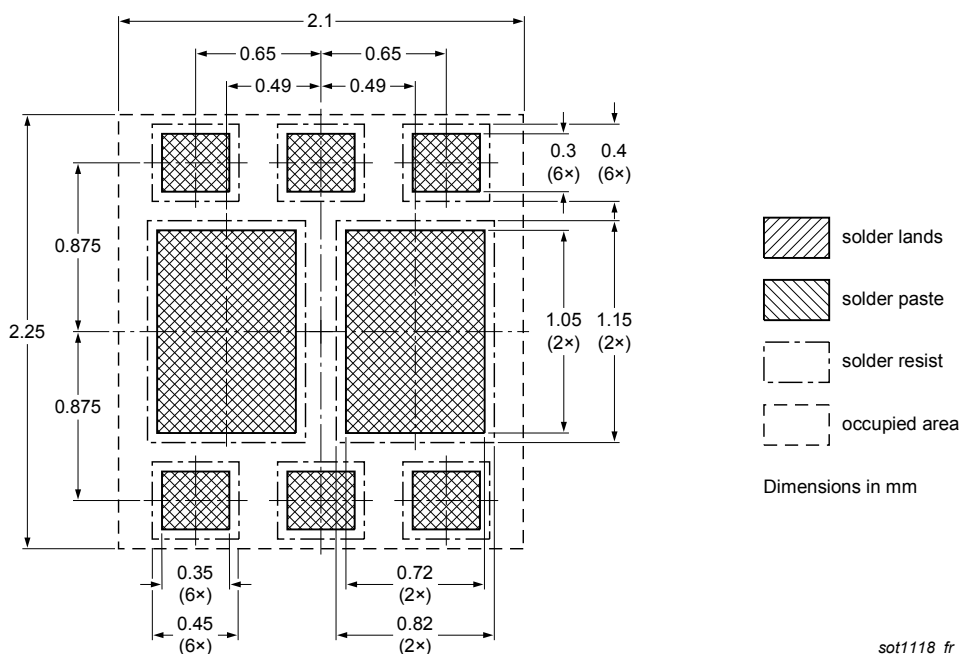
Reflow soldering footprint for DFN2020-6 (SOT1118)
